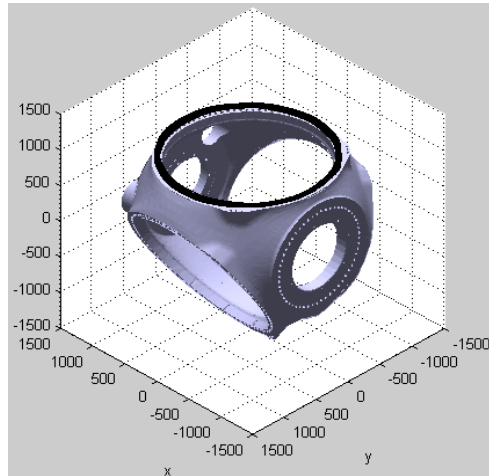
Assembling wind turbines of large dimension and power may require the tightening of up to 100 bolt and nuts, as it is the case of fastening the ball bearings supporting wind blades on the flange of the rotor (highlighted in black colour)
